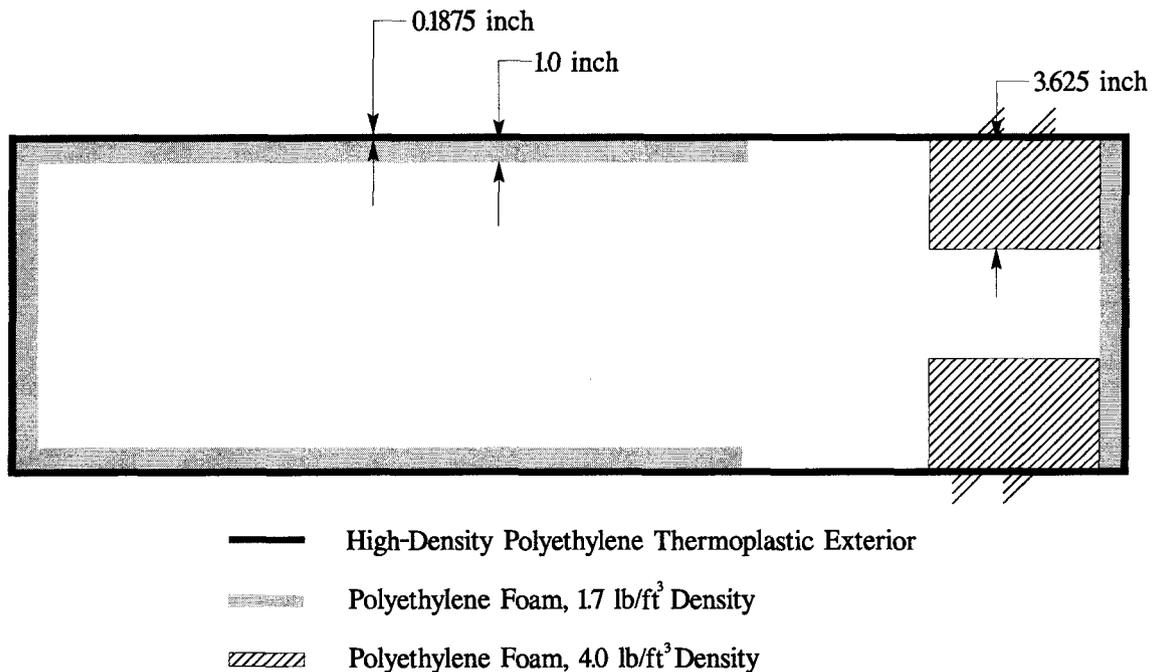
SCHEMATIC OF STANDARD VIKING OVERPACK CONSTRUCTION
